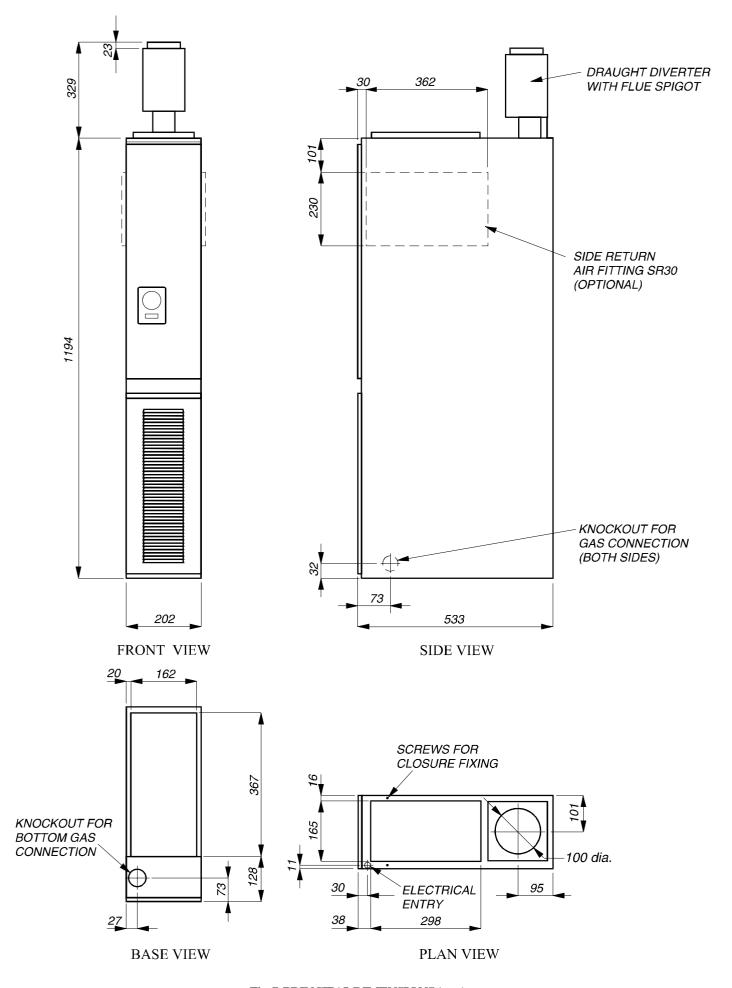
, PRINCIPAL DIMENSIONS (mm)
